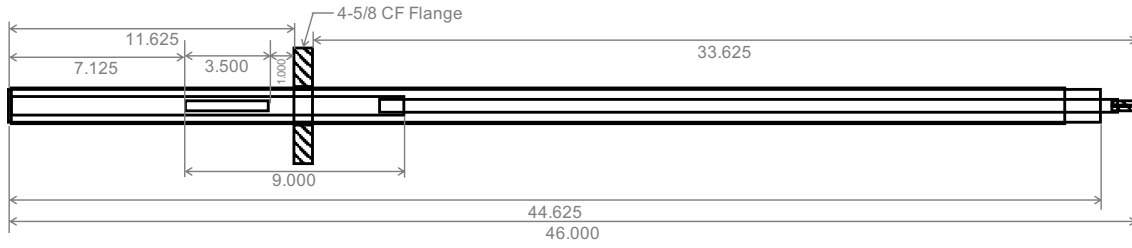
Technical drawing of the LArIAT high voltage feedthrough with dimensions in inches.
